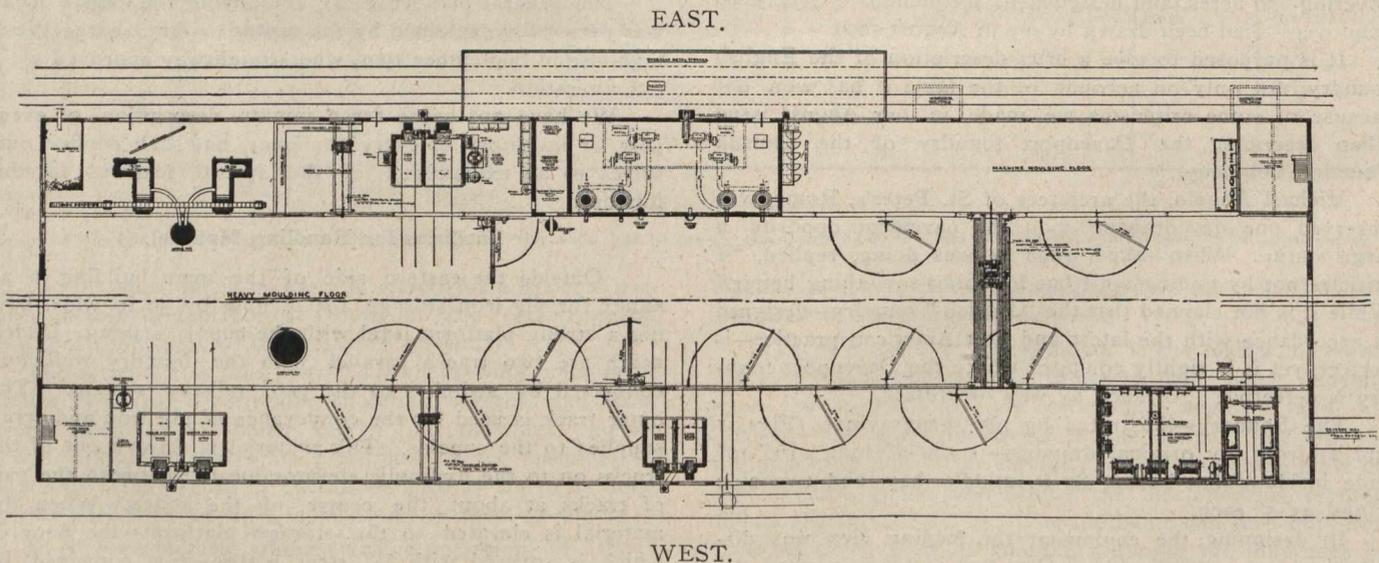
General Plan of British-Westinghouse Iron Foundry.
